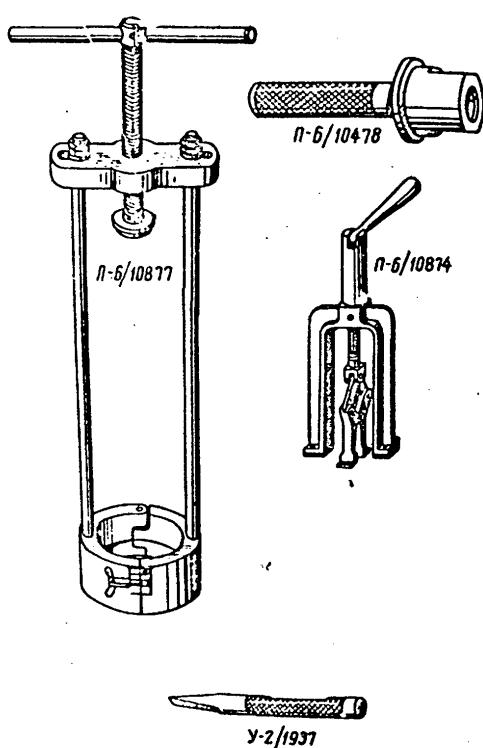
TOOLS AND FIXTURES FOR CRANKSHAFT ASSEMBLY
